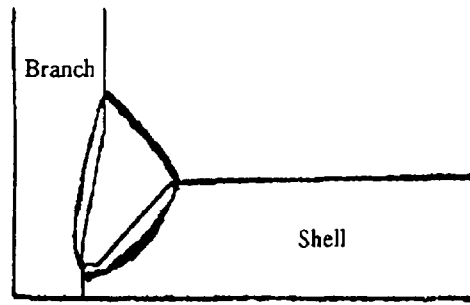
b : Partially penetrated "set in" weld.
